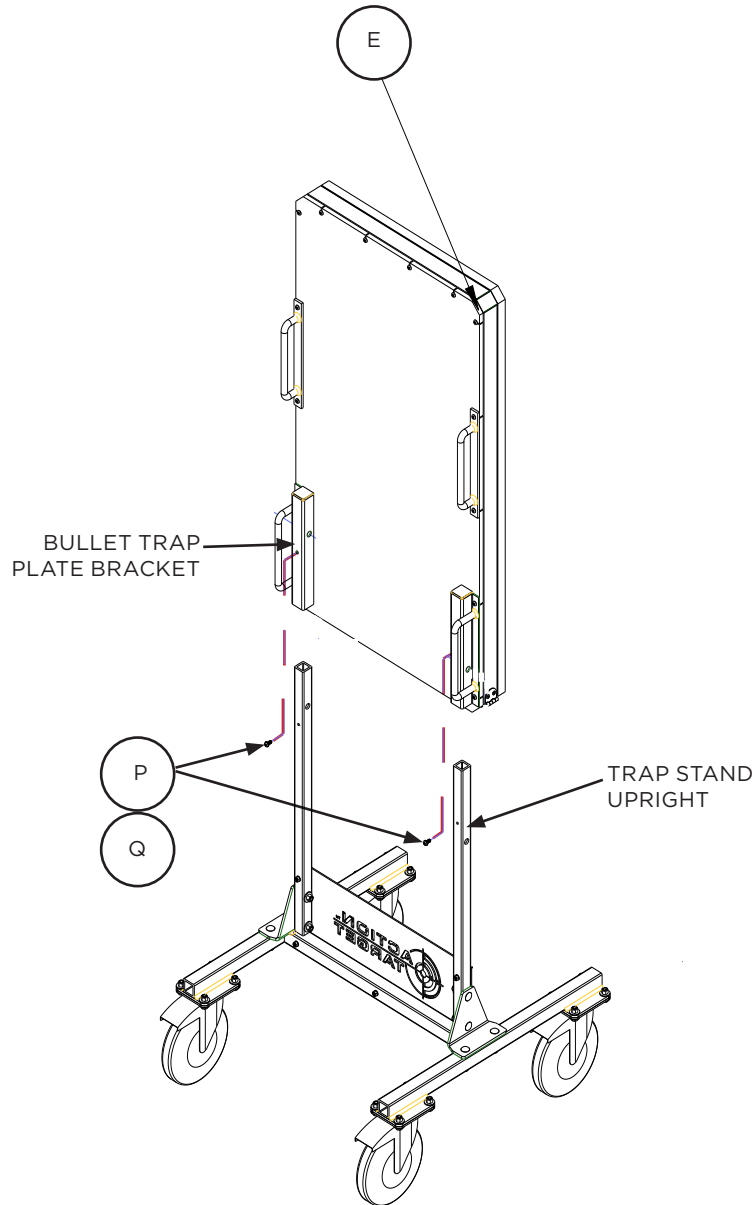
INSTALL BUTTON-HEAD CAP SCREWS AND SPLIT LOCK WASHERS
